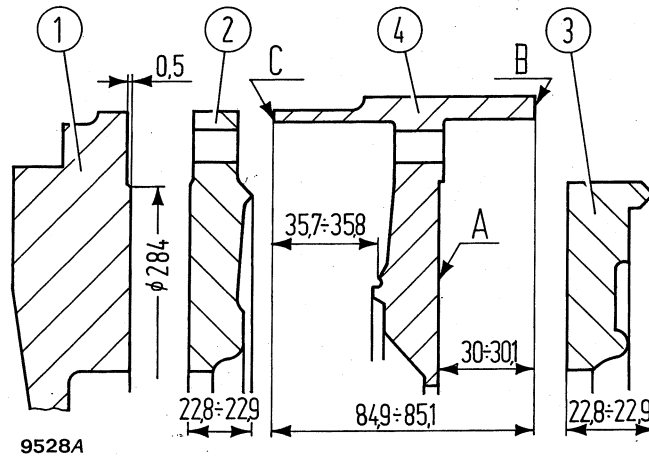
Dimensional data in mm of pressure plates for P.T.O. clutch (2), transmission clutch (3) and clutch casing (4). A/B/C See text - 1. Engine flywheel.
